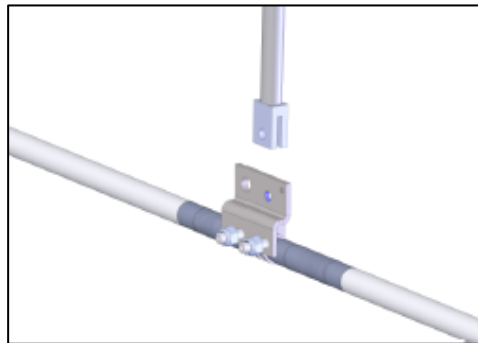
CW insulators inner connector showing threaded stud and short arc horns, and connection for spring dropper tube (Arthur Flury, 2017)
